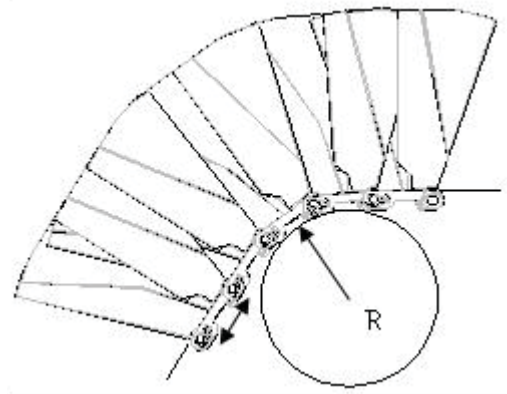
Conveyor Top Radius min. 3½ inch [90mm]
